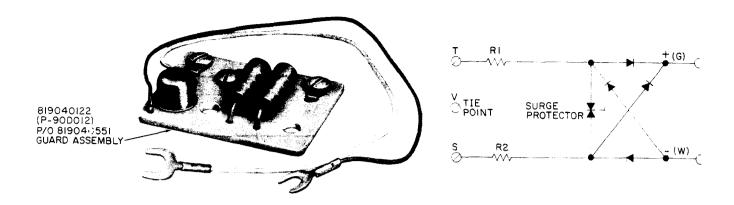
₱P-90D012 (MD) Guard Assembly and Schematic
